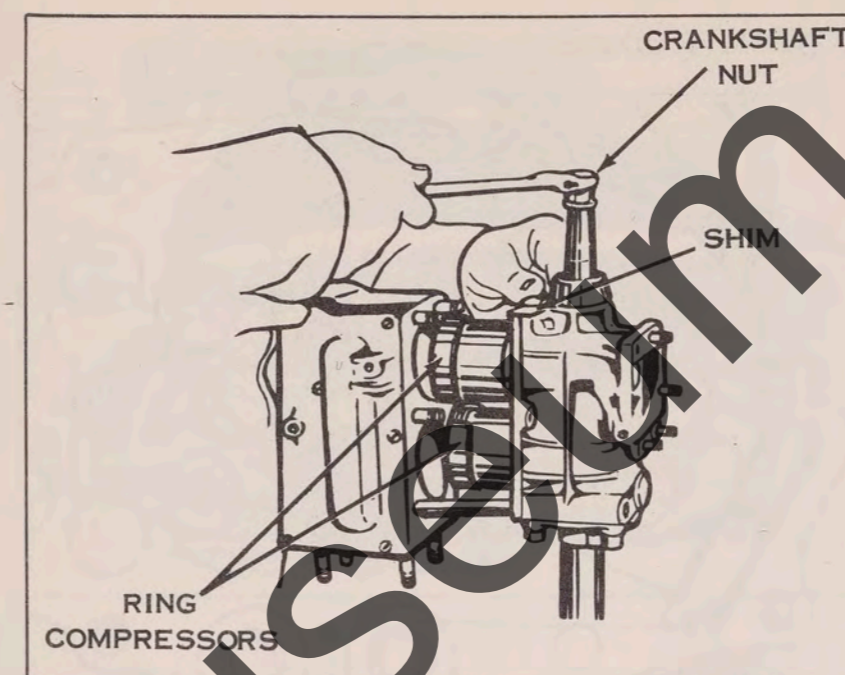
Assembling Crankcase to Cylinder (Step 1)
